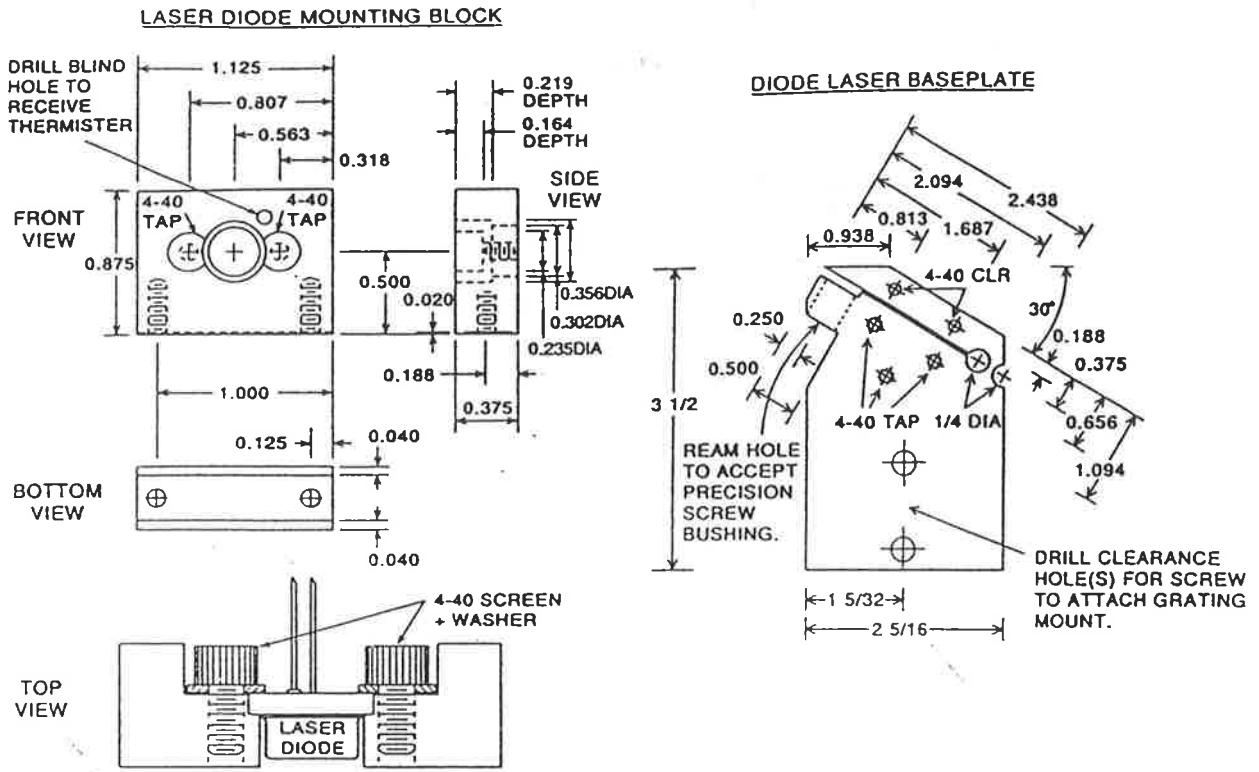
Schematic diagram of the laser mounting block and laser base plate (machine drawing) from reference [76].
